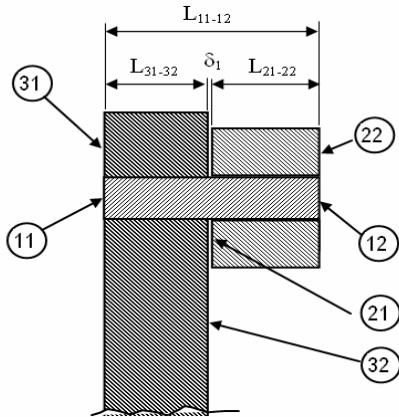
Dimensions and related surfaces in PlanetGearCarrier subassembly.
